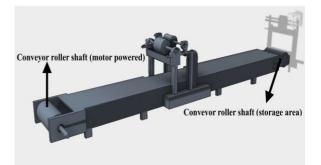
Isometric View of the Automated Machine with Motor Roller Description.
